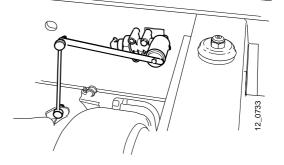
The rear level sensor is located on the right-hand side of the frame above the drive axle.
